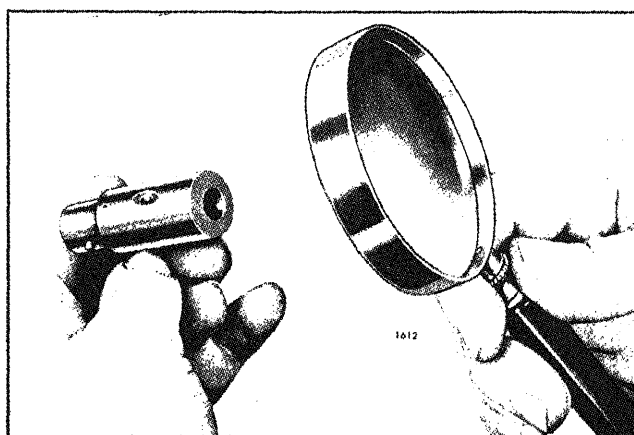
Examining Sealing Surface with a Magnifying Glass
